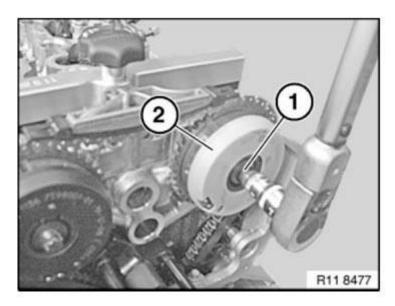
Tightening Central Bolt Of Exhaust Adjustment Unit Courtesy of BMW OF NORTH AMERICA, INC.
